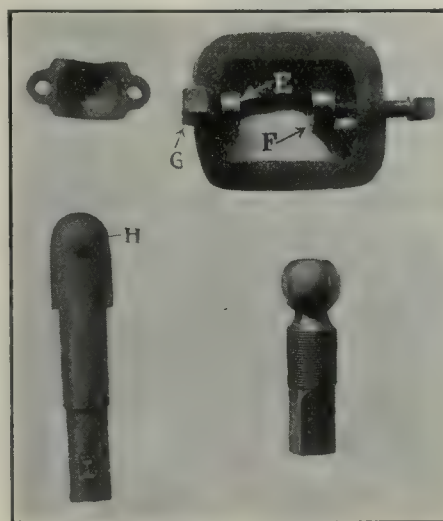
SPECIAL DOG AND SOCKET BORING TOOL.
